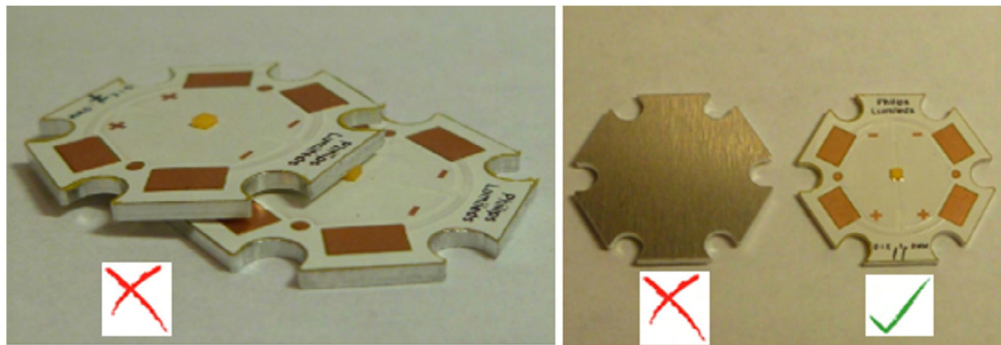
Do not stack assembled LED on PCBs on top of each other (left). Do not place assembled PCBs with the top side down on any surface (right).
